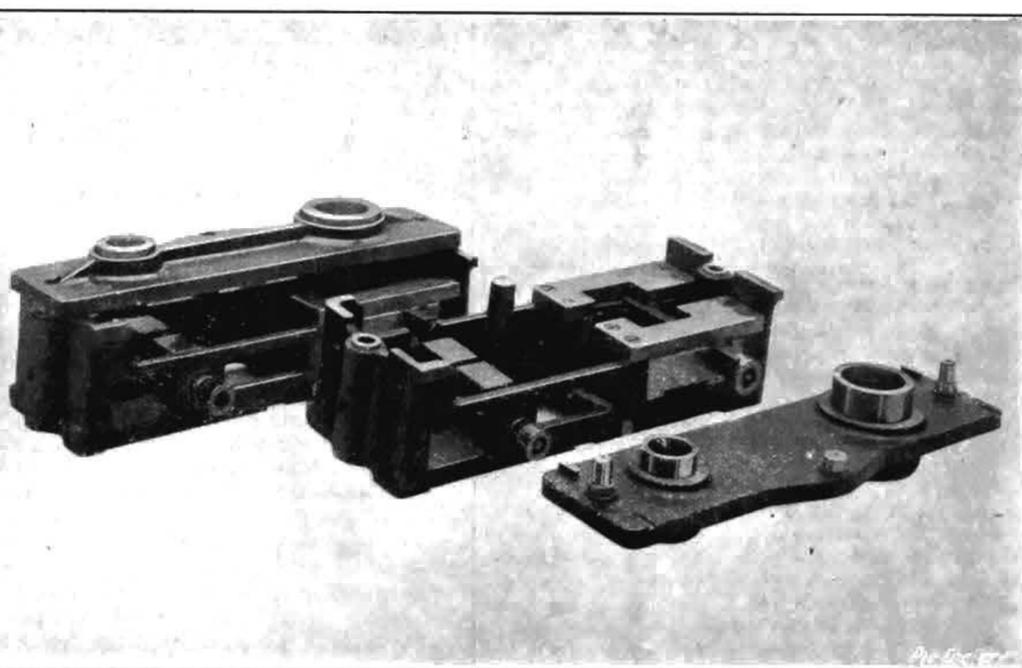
BORING FIXTURE FOR LARGE AND SMALL ENDS OF CONNECTING RODS
